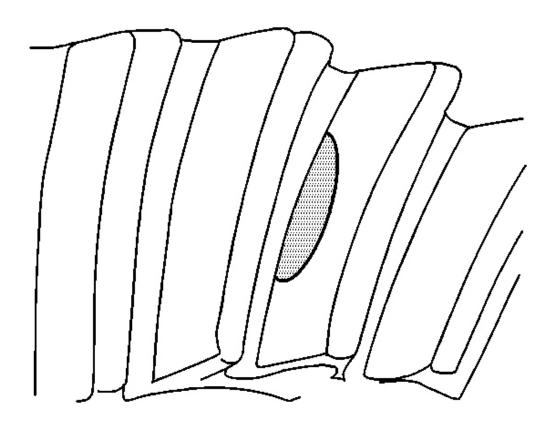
Identifying Low Flank Contact Pattern Courtesy of GENERAL MOTORS CORP.
